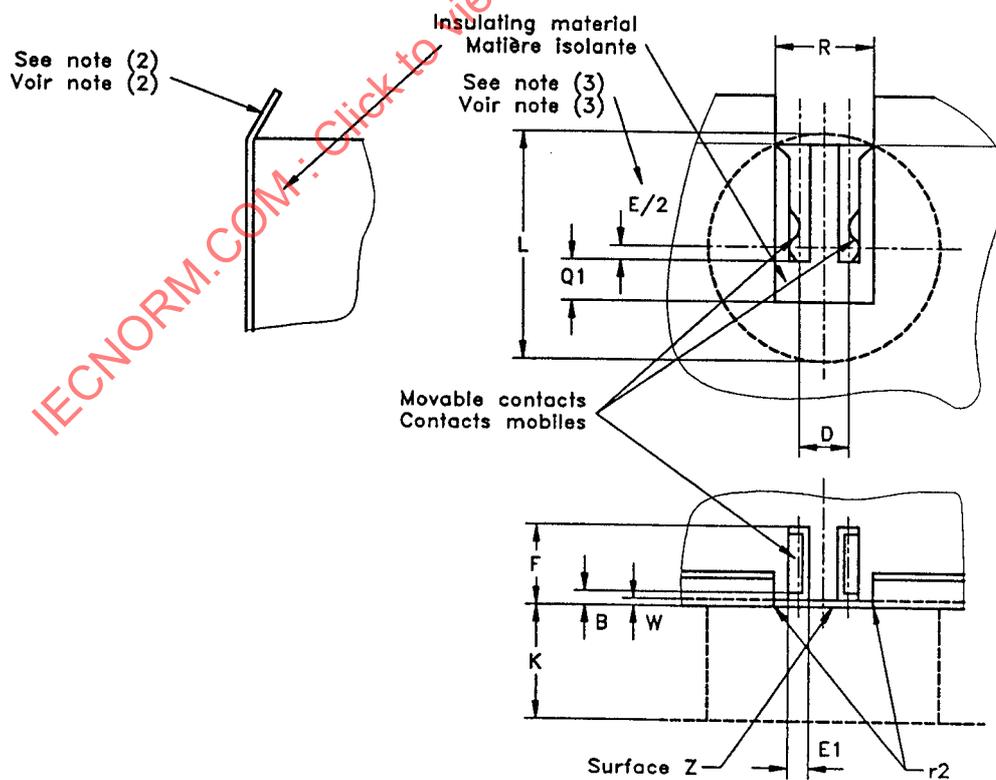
CONTACT ASSEMBLY WITH PARALLEL SLIDE-IN GROOVES
